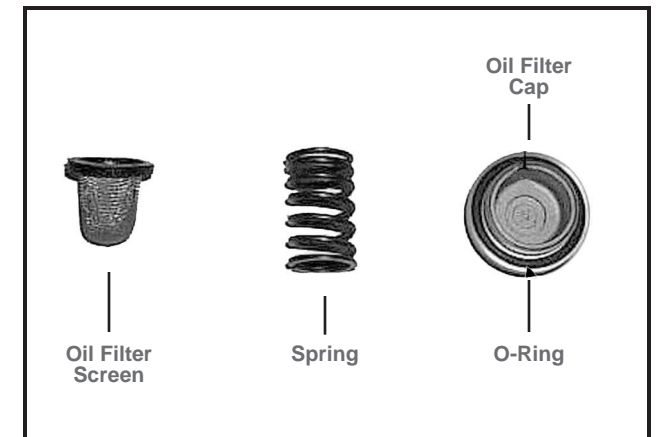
Oil Filter Cap / O-Ring / Screen / Spring
